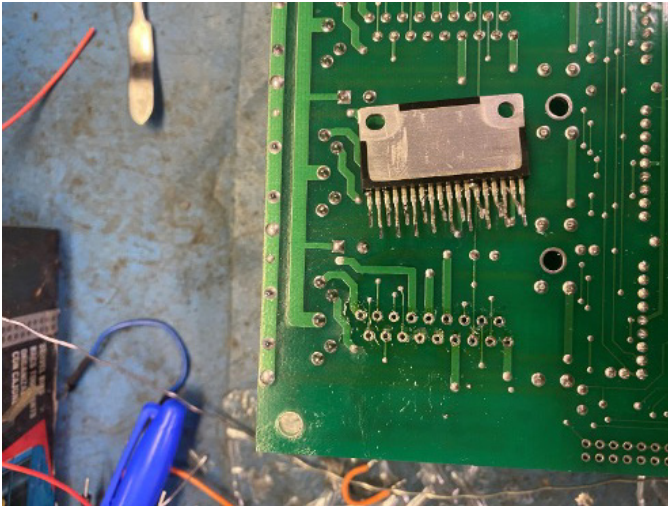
The Motor Driver Chip removed from the front side of the circuit board.
